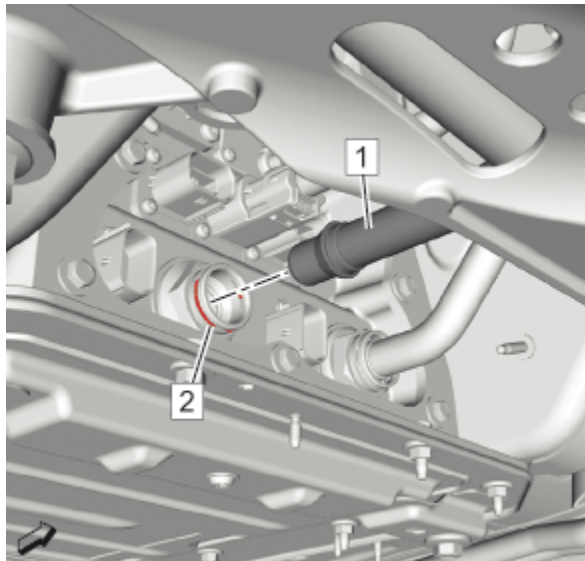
Retainer And Drive Motor Battery Coolant Inlet Hose
